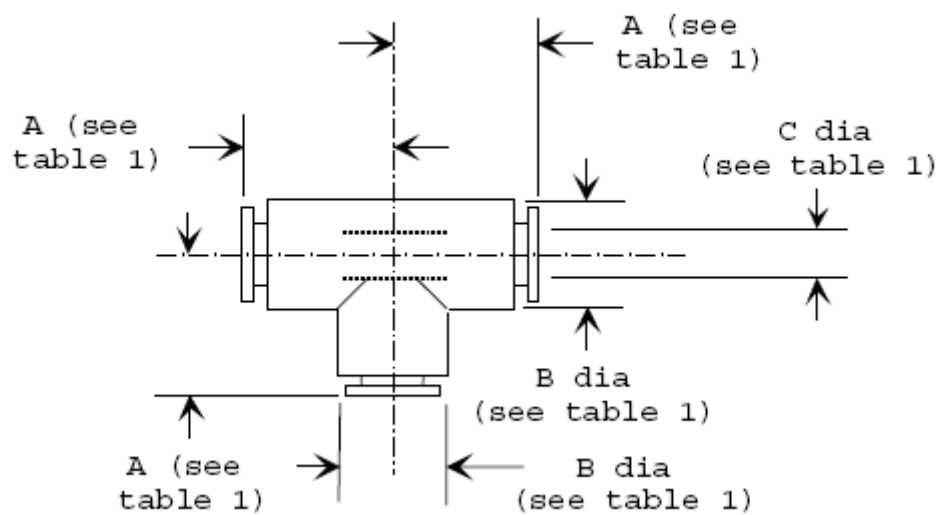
BOF tube tee/tee tube coupler (configuration T).
